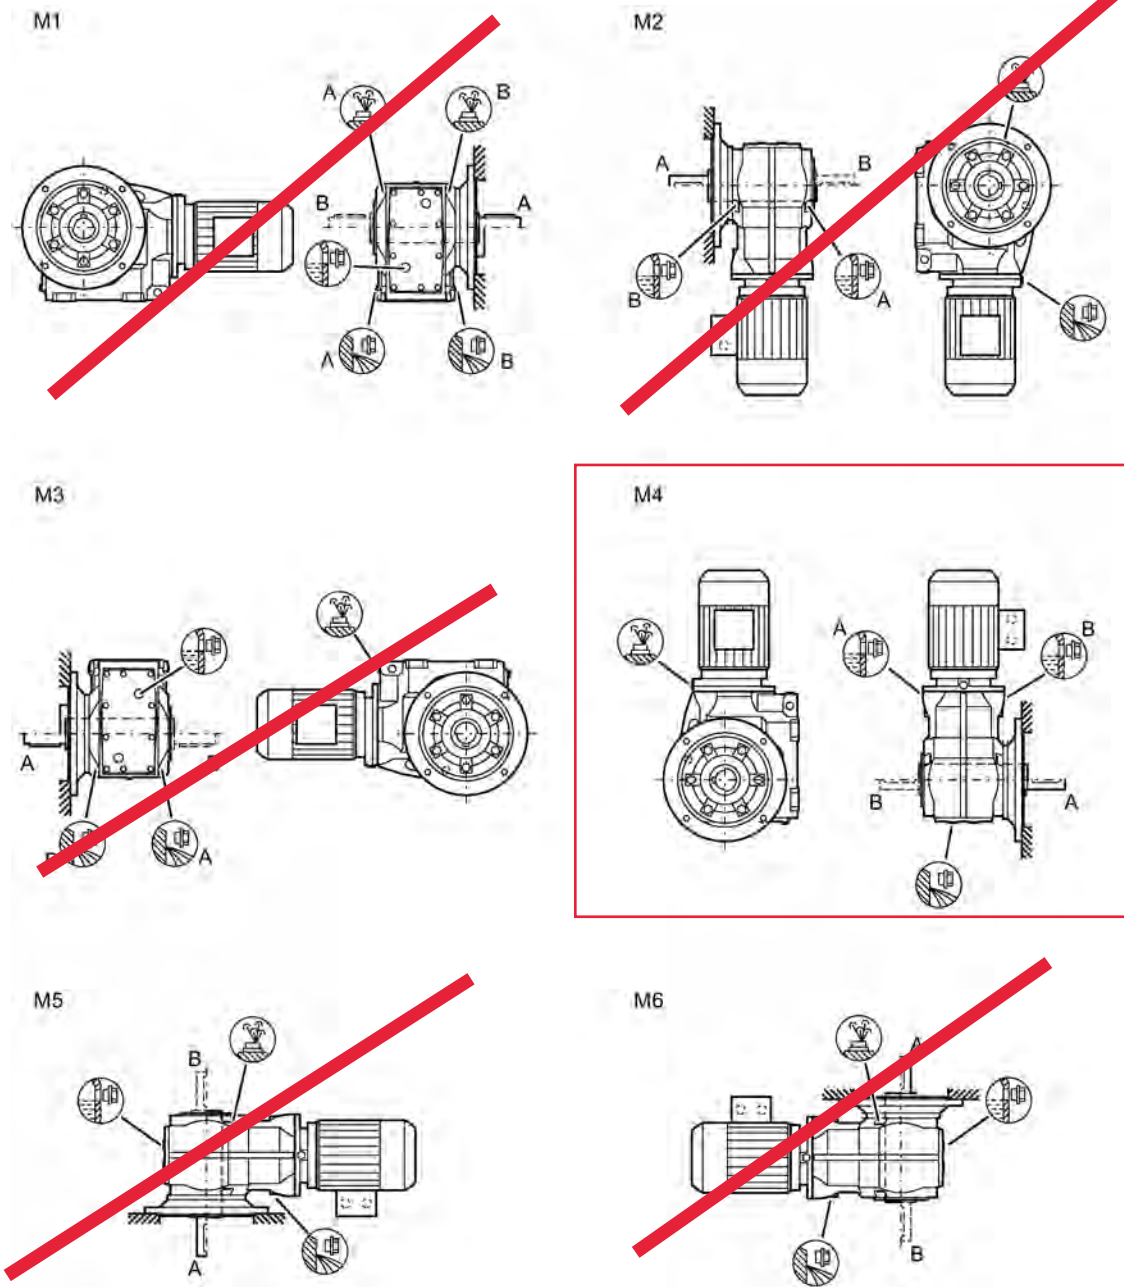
Mounting positions for bevel gearbox K.F flange-mounted design and KAZ with housing flange, sizes 39 - 189
